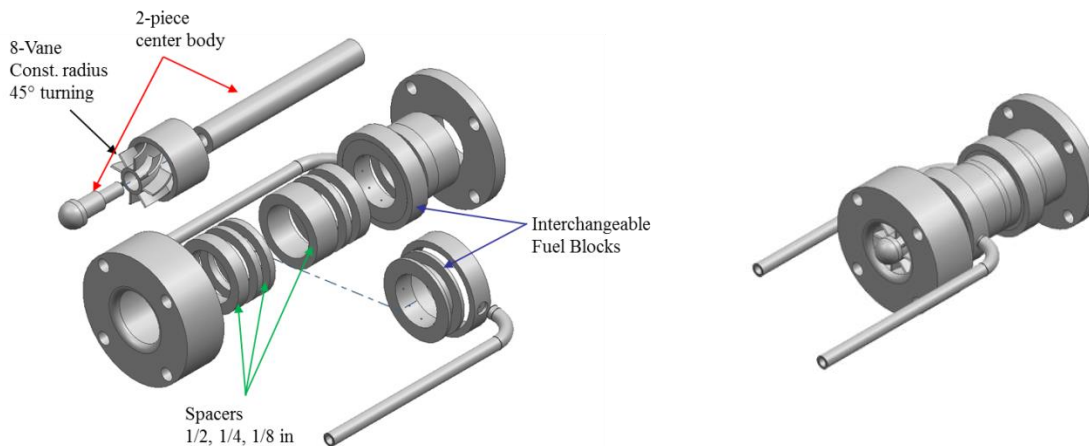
CAD rendering of the modular pre-mixer. Exploded view (left), assembled view (right)
